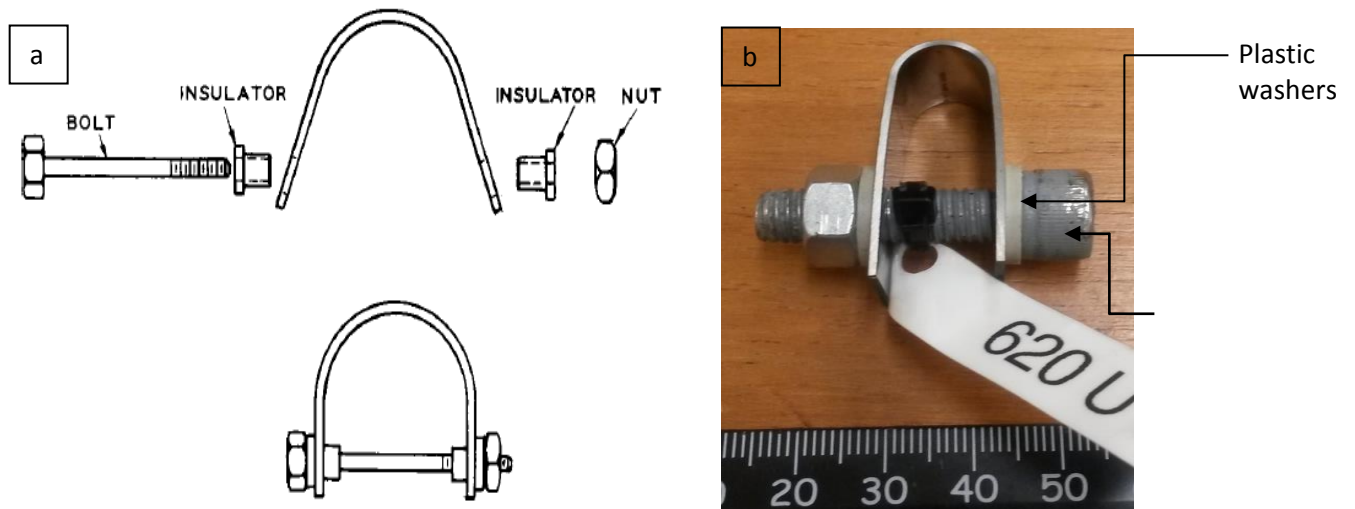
a) 2-stage stressing method ⁽⁶³⁾ ; b) final U-bend specimen
